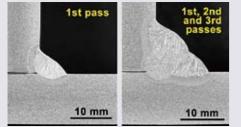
Self-peeling slag of conventional FCW can cause the lapping bead to form irregular bead toes in multi-layer fillet welding.
